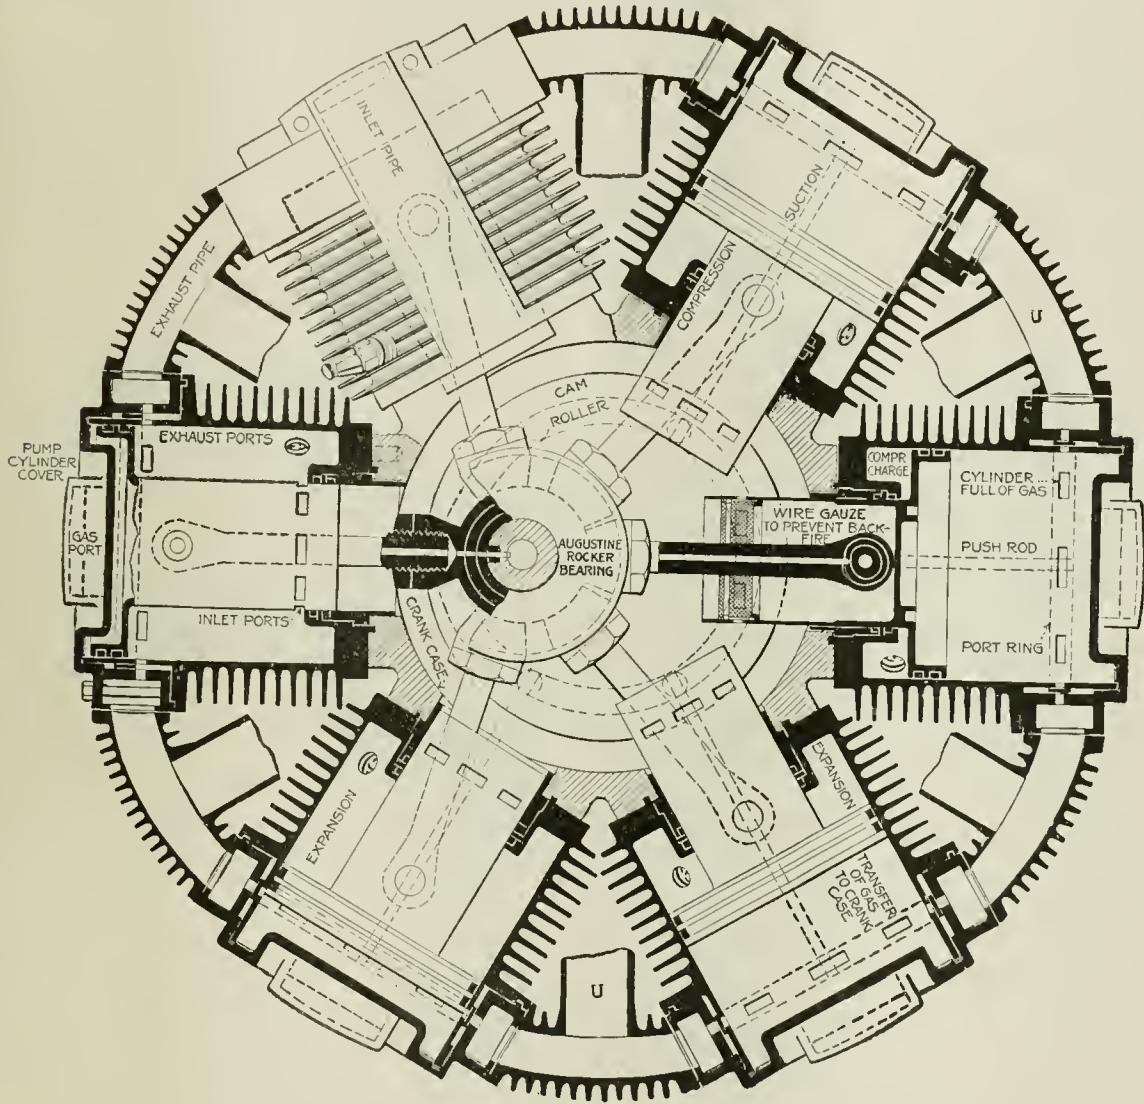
END SECTIONAL VIEW THROUGH THE AUGUSTINE ENGINE
